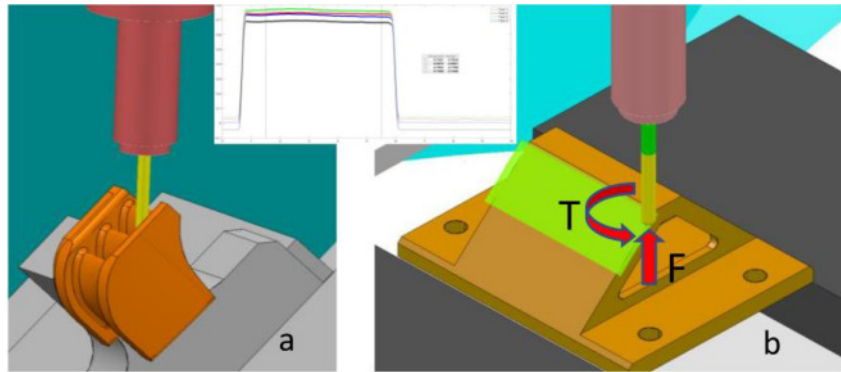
(a) CAD model of printed segment; (b) Printed artefact to develop machining strategy
